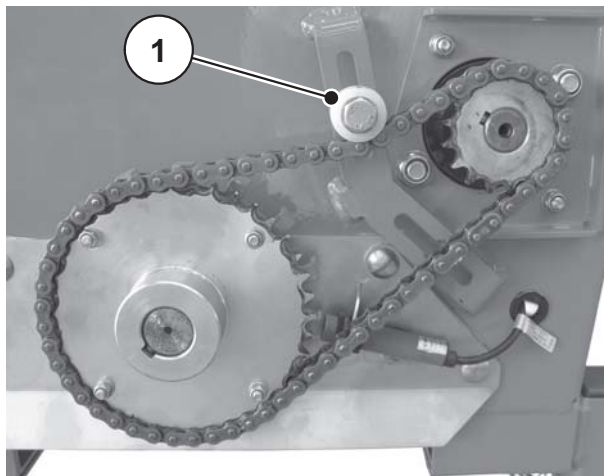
Chain idler assembly (anti-clockwise PTO drive)
